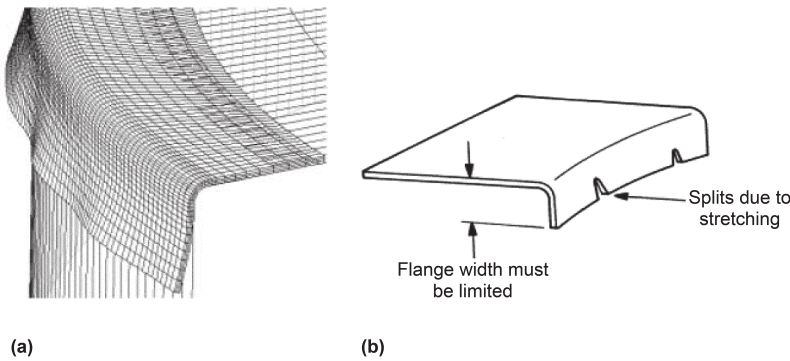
Defects in contour flanging. (a) Wrinkling in shrink flanging. (b) Fracture in stretch flanging
